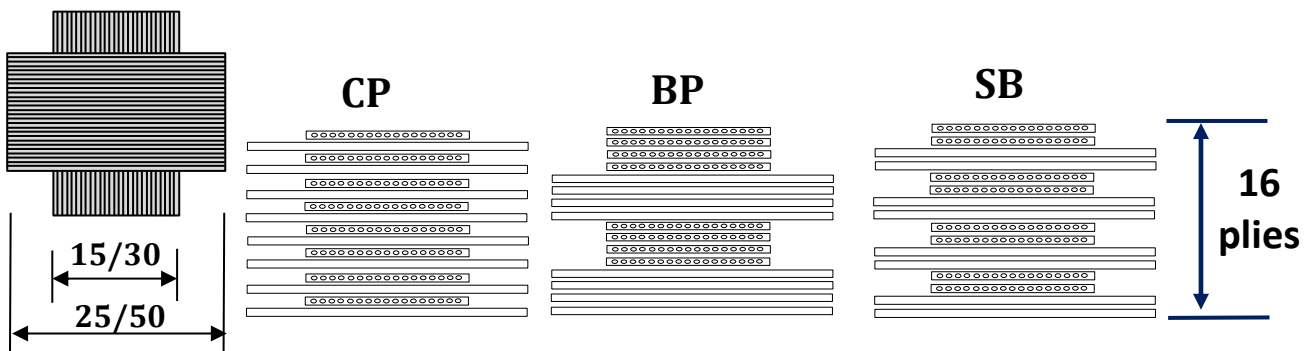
Plan view of baseline and scale-up specimens with cross section view of lay-up.
